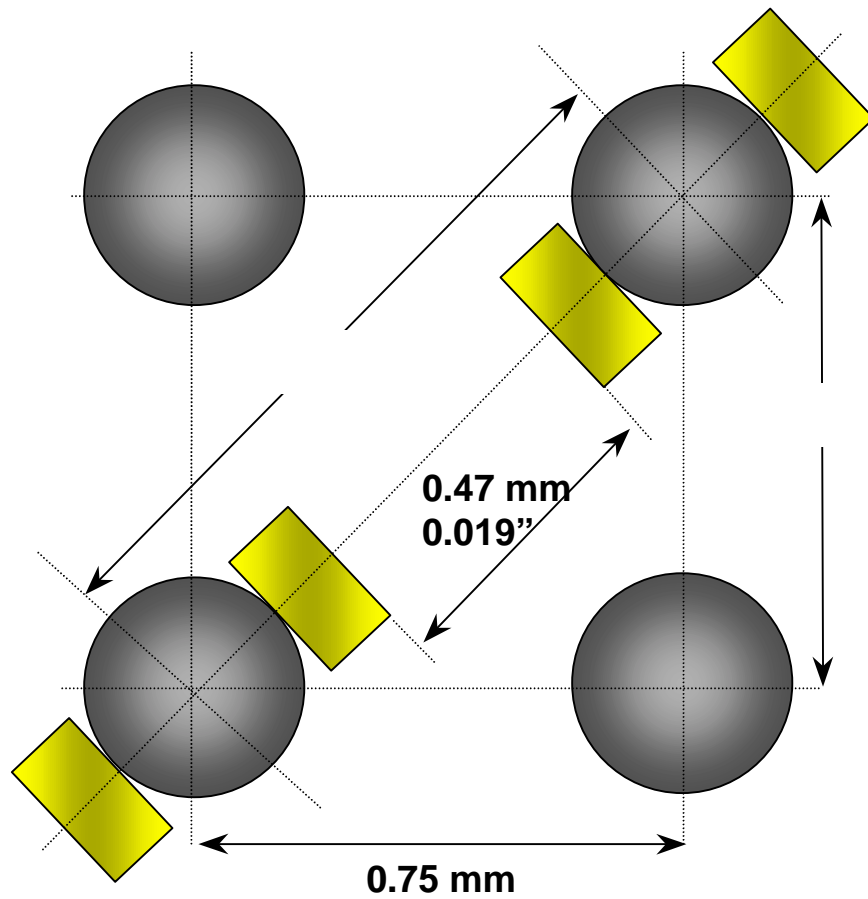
CSP Socket which is actuated at 45° to axis of array to provide more space for contacts to open
